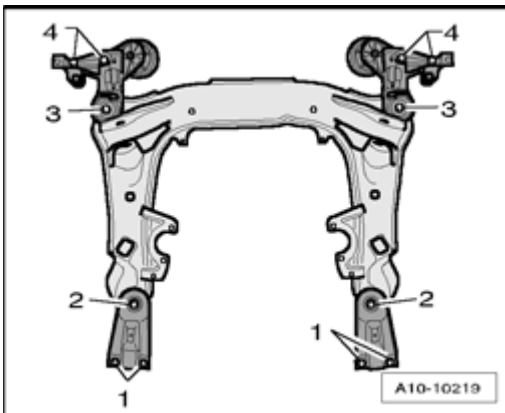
Removing/Installing Engine Mount Plate Bolts In Diagonal Sequence And In Stages
